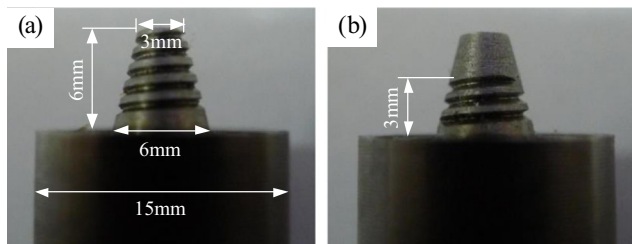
Tools used in experiment. a Full-threaded pin. b Bottom-half-threaded pin
